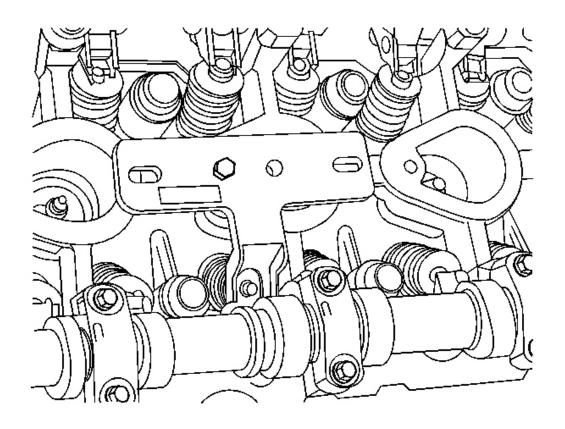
Compressing Valve Spring Courtesy of GENERAL MOTORS CORP.
